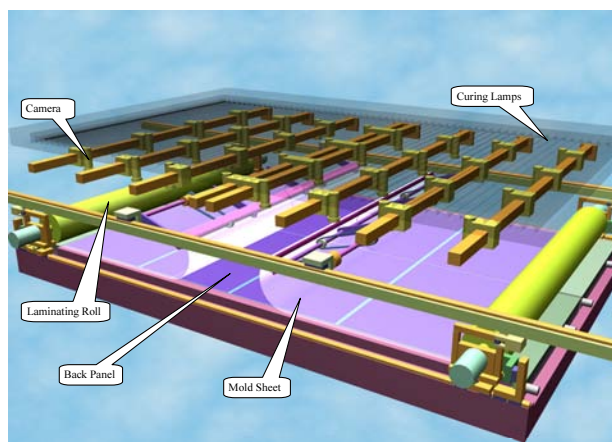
2-D Multi-up Multi-headed sheet mold laminator
